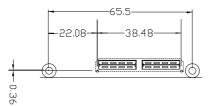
MIOe-220 Mechanical Drawing (MIOe Connector)
